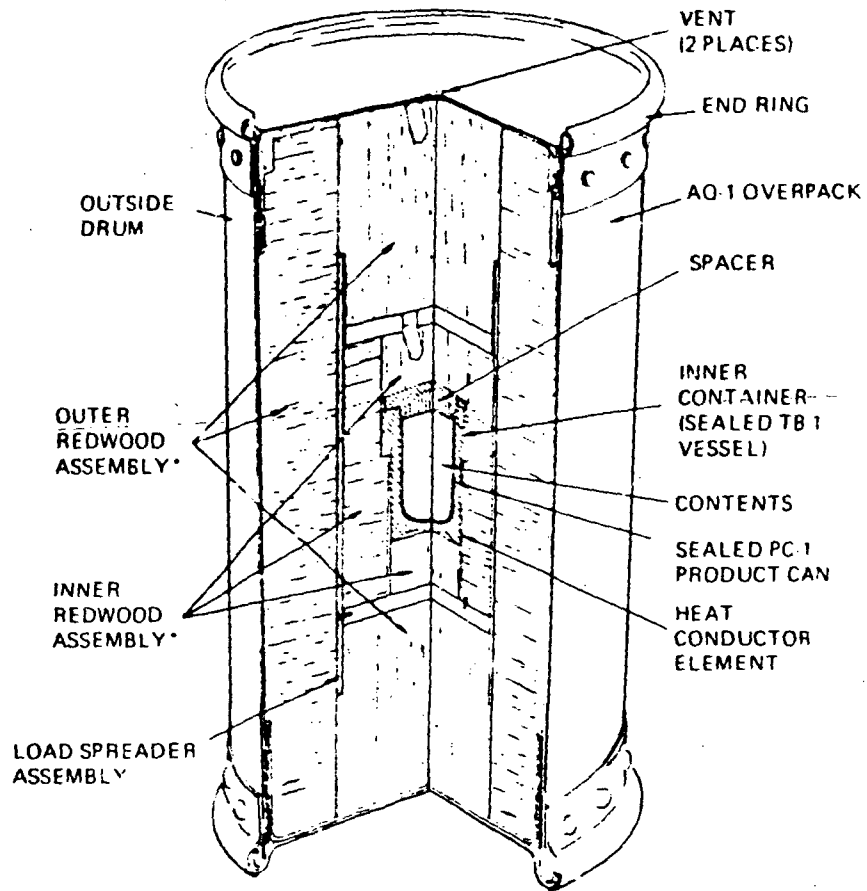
shows the principal elements of the package. A set of engineering drawings and specifications for the packaging is included in Section 9.0.
